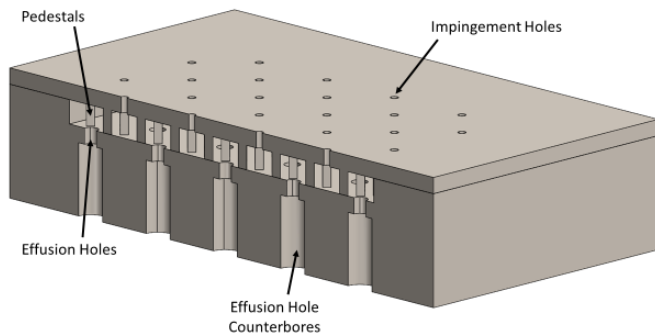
CAD SECTION VIEW OF ASSEMBLED TEST PIECE
